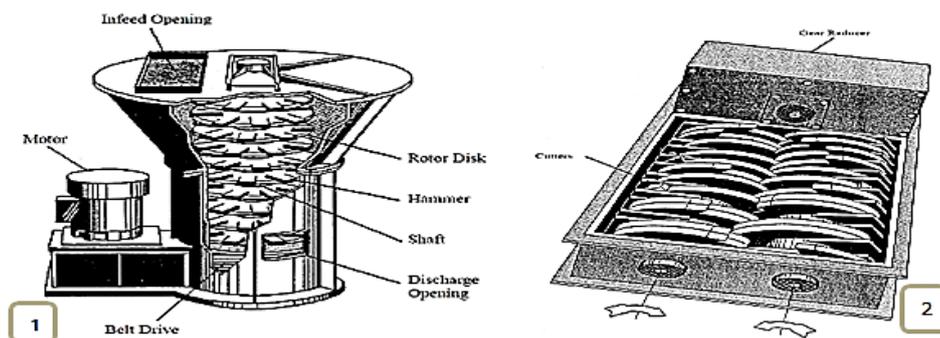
(1) Hammermil vertical, (2) shear shredding. [32]
